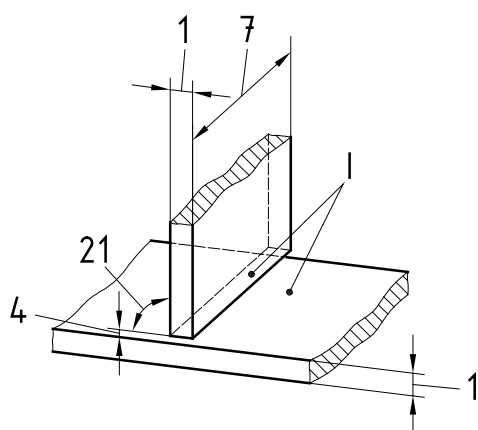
Preparation for fillet weld (T-joint)
